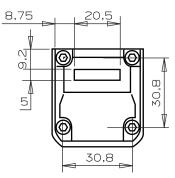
Dimensional drawing safety switches i110-SA223 and i110-SA313
